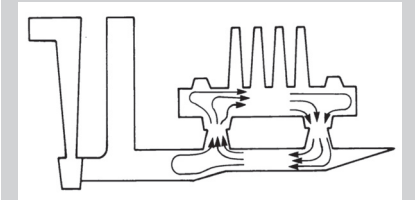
The mechanism for developing convection in bottom-gated castings.<sup>14</sup>
